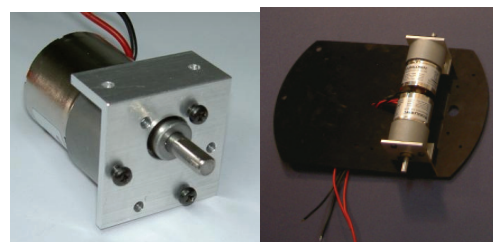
L shape Motor support (left) and robot base with two motors on (right)
